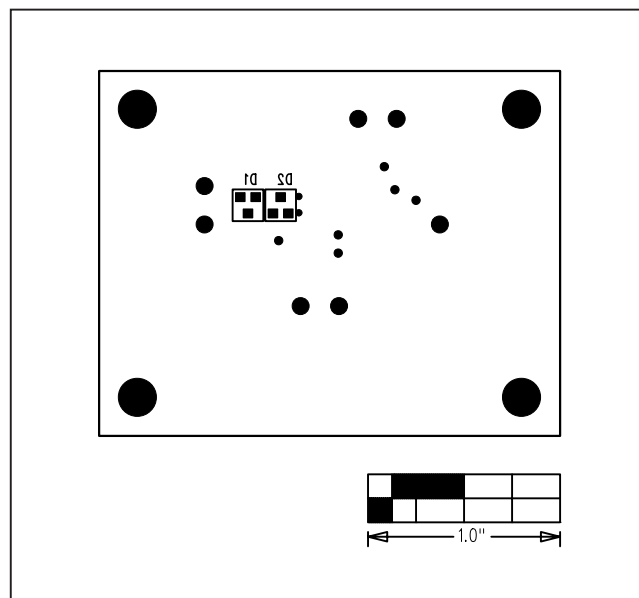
MAX9945 EV Kit Component Placement Guide—Solder Side
